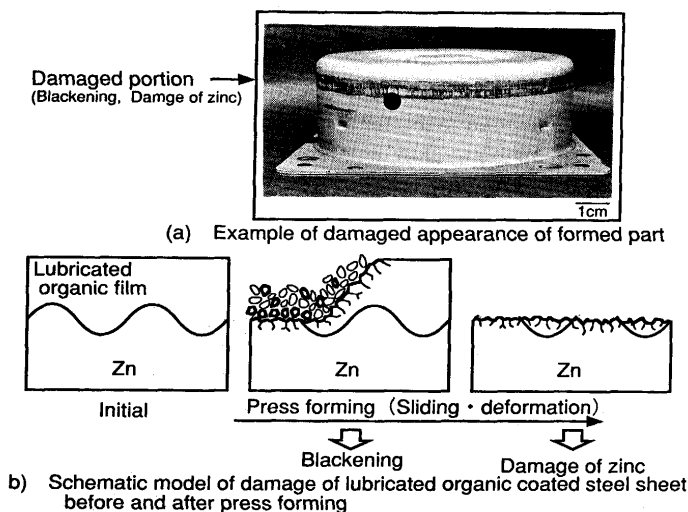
Appearance of formed part and schematic model of damage of lubricated organic coated steel sheet before and after press forming.
